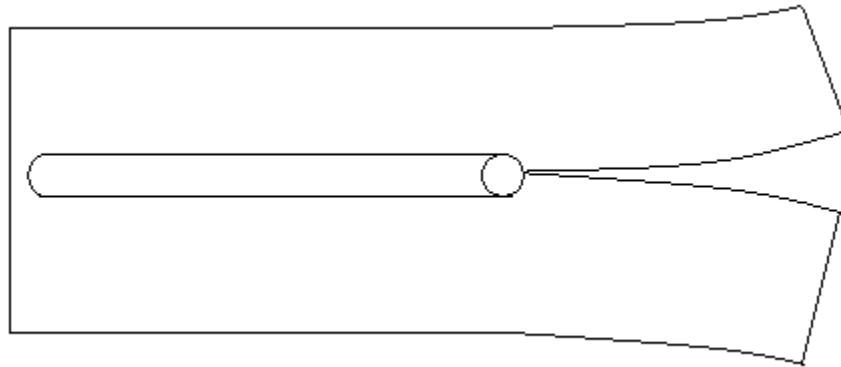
Rotational distortion ahead of FSW pin tool in a butt weld
